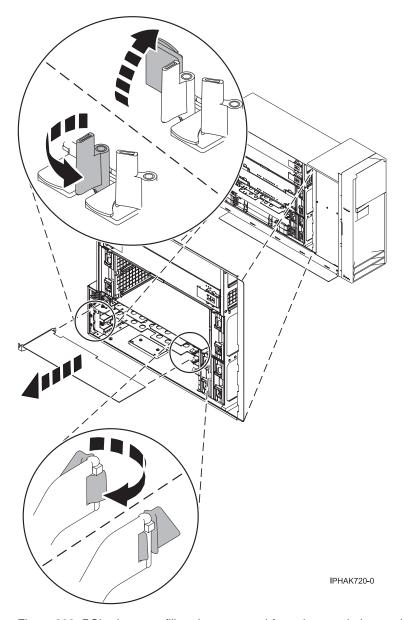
PCI adapter or filler plate removed from the stand-alone unit
